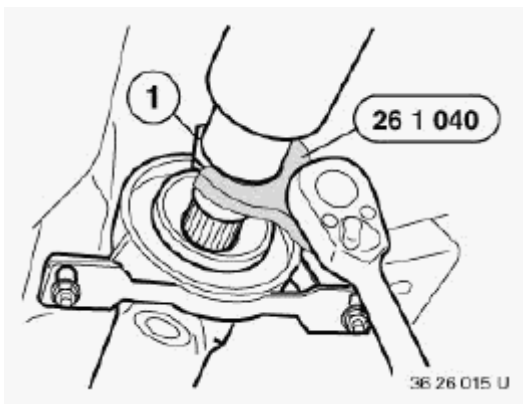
Threaded Ring And Special Tool (26 1 040)
